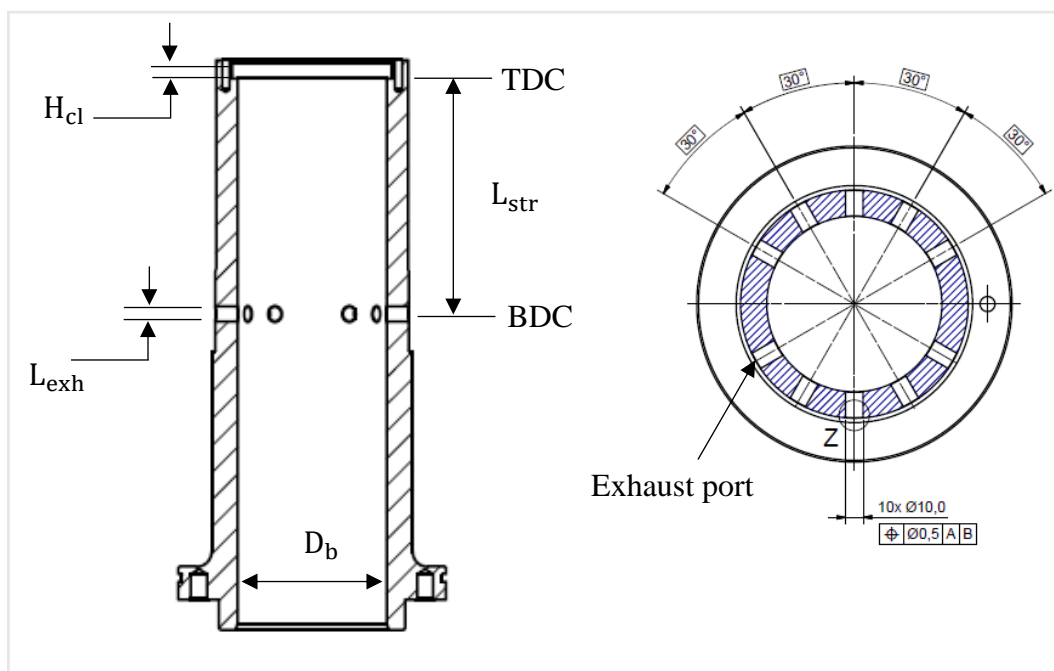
Engine cylinder with operating dimensions (CAD by UoS)
